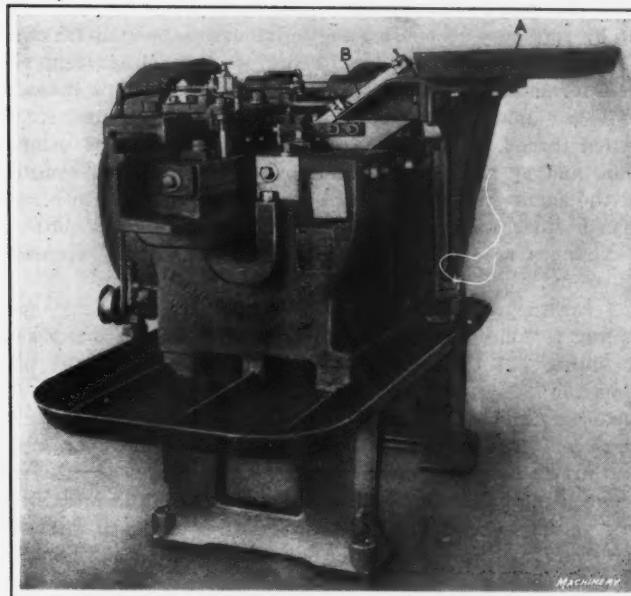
Reciprocating Screw-thread Rolling Machine equipped with Semi-automatic Feeding Mechanism
